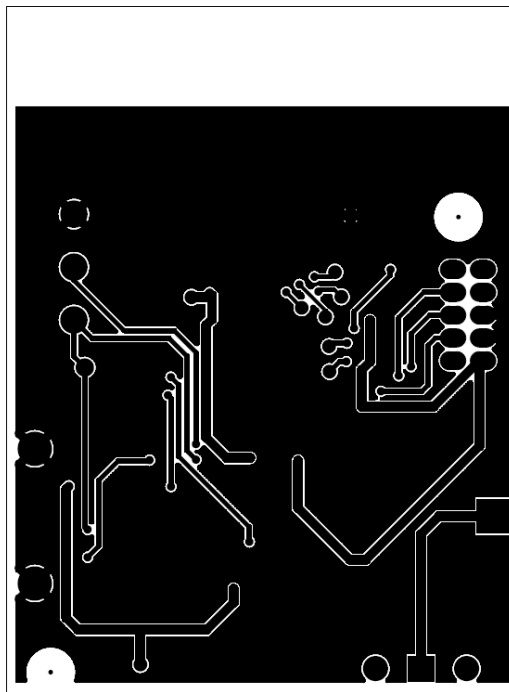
IoT Low Power Sensor Node board layout (bottom view)
